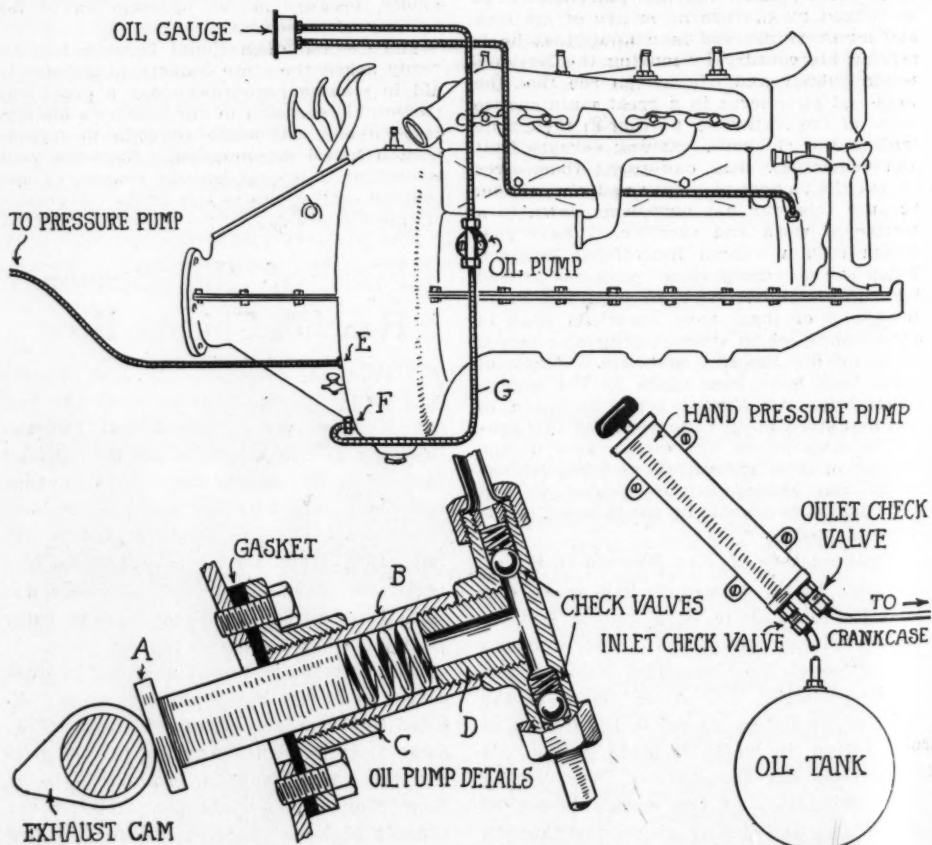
Oiling system as auxiliary unit for Ford engine. Such a system is necessary for high-speed work
